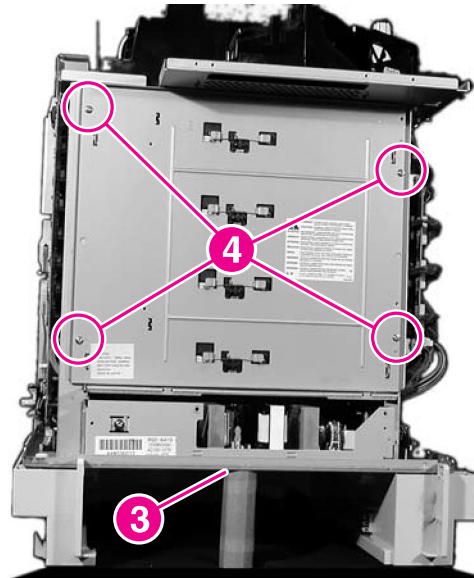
Remove the laser/scanner cover plate (1 of 2)
